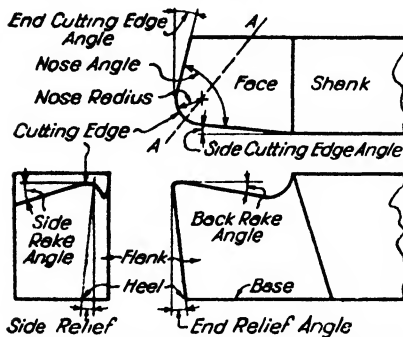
Nomenclature of a ground, straight cutting edge, right-cut, straight-shank, single-point tool. (A.S.A. standard.)
